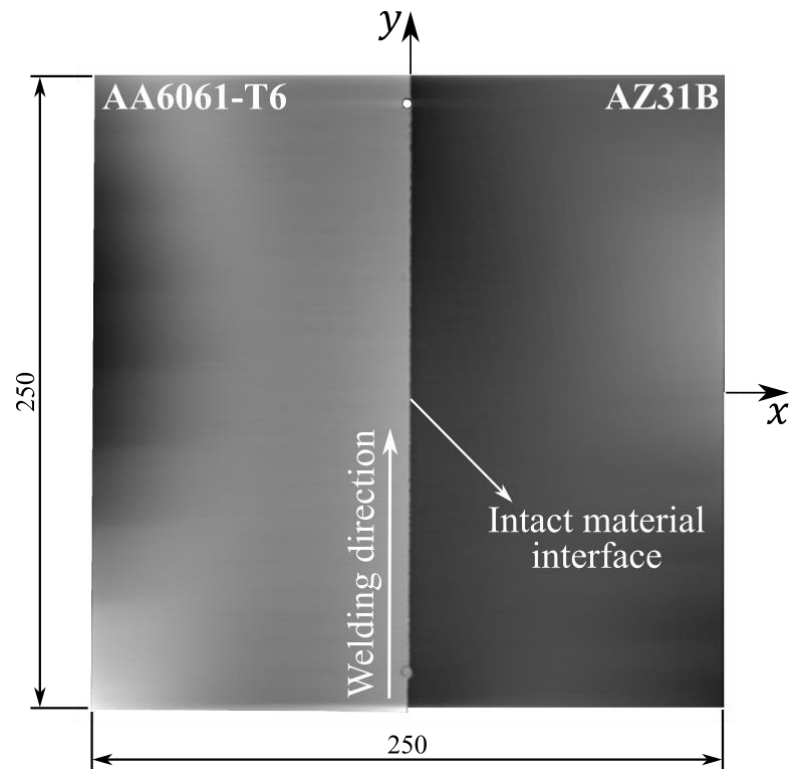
A through-thickness cross-sectional view of the welded test specimen, from a CT scan, showing its intact weld condition. Dimensions are in *mm*.
